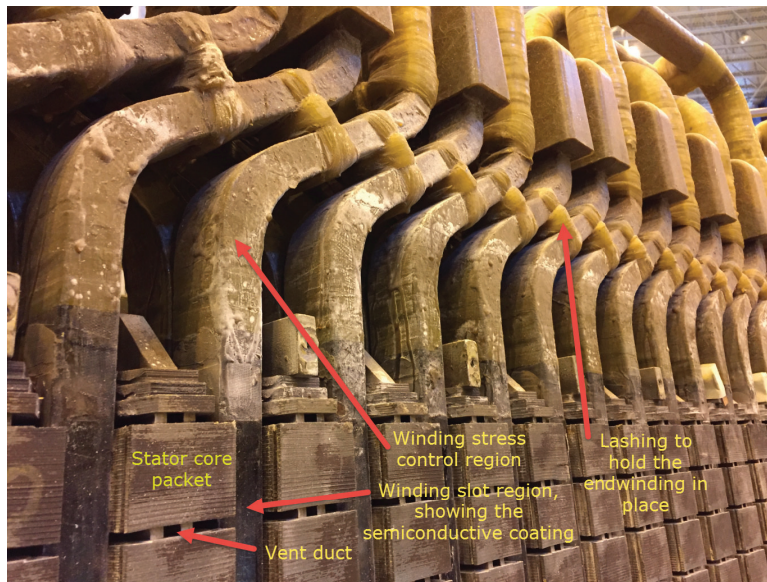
Close-up view of the top of a stator with wedges removed.
